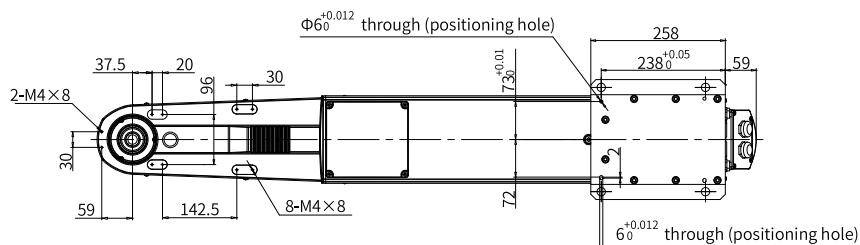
Thread dimensions for installing the camera and pneumatic valve (unit: mm)
